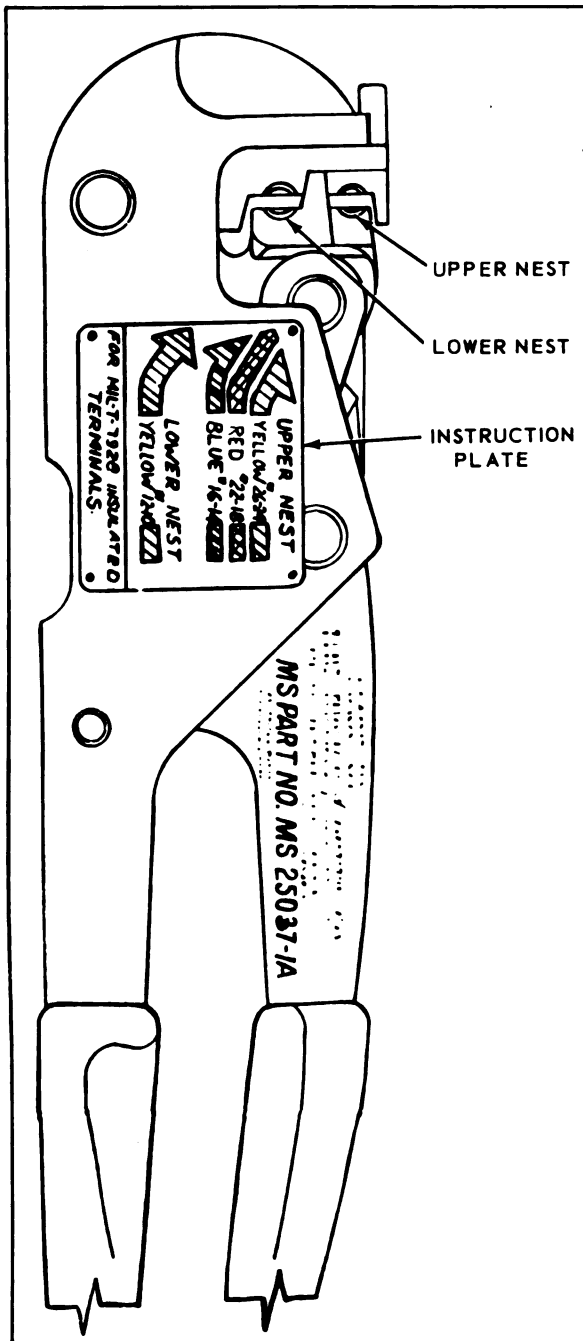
Tool MS25037 Hand Crimping - Pre-Insulated Copper Terminal Lugs
